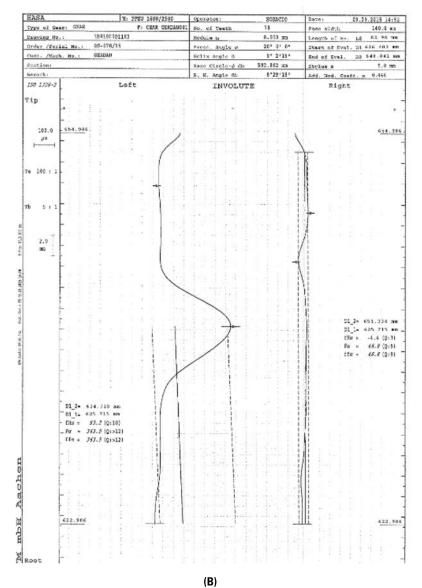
Damaged gear placed in gear-testing machine; a)—result of inspection; b)—pitting is about 0.4 mm deep and located in diameter of 634.710 mm.
